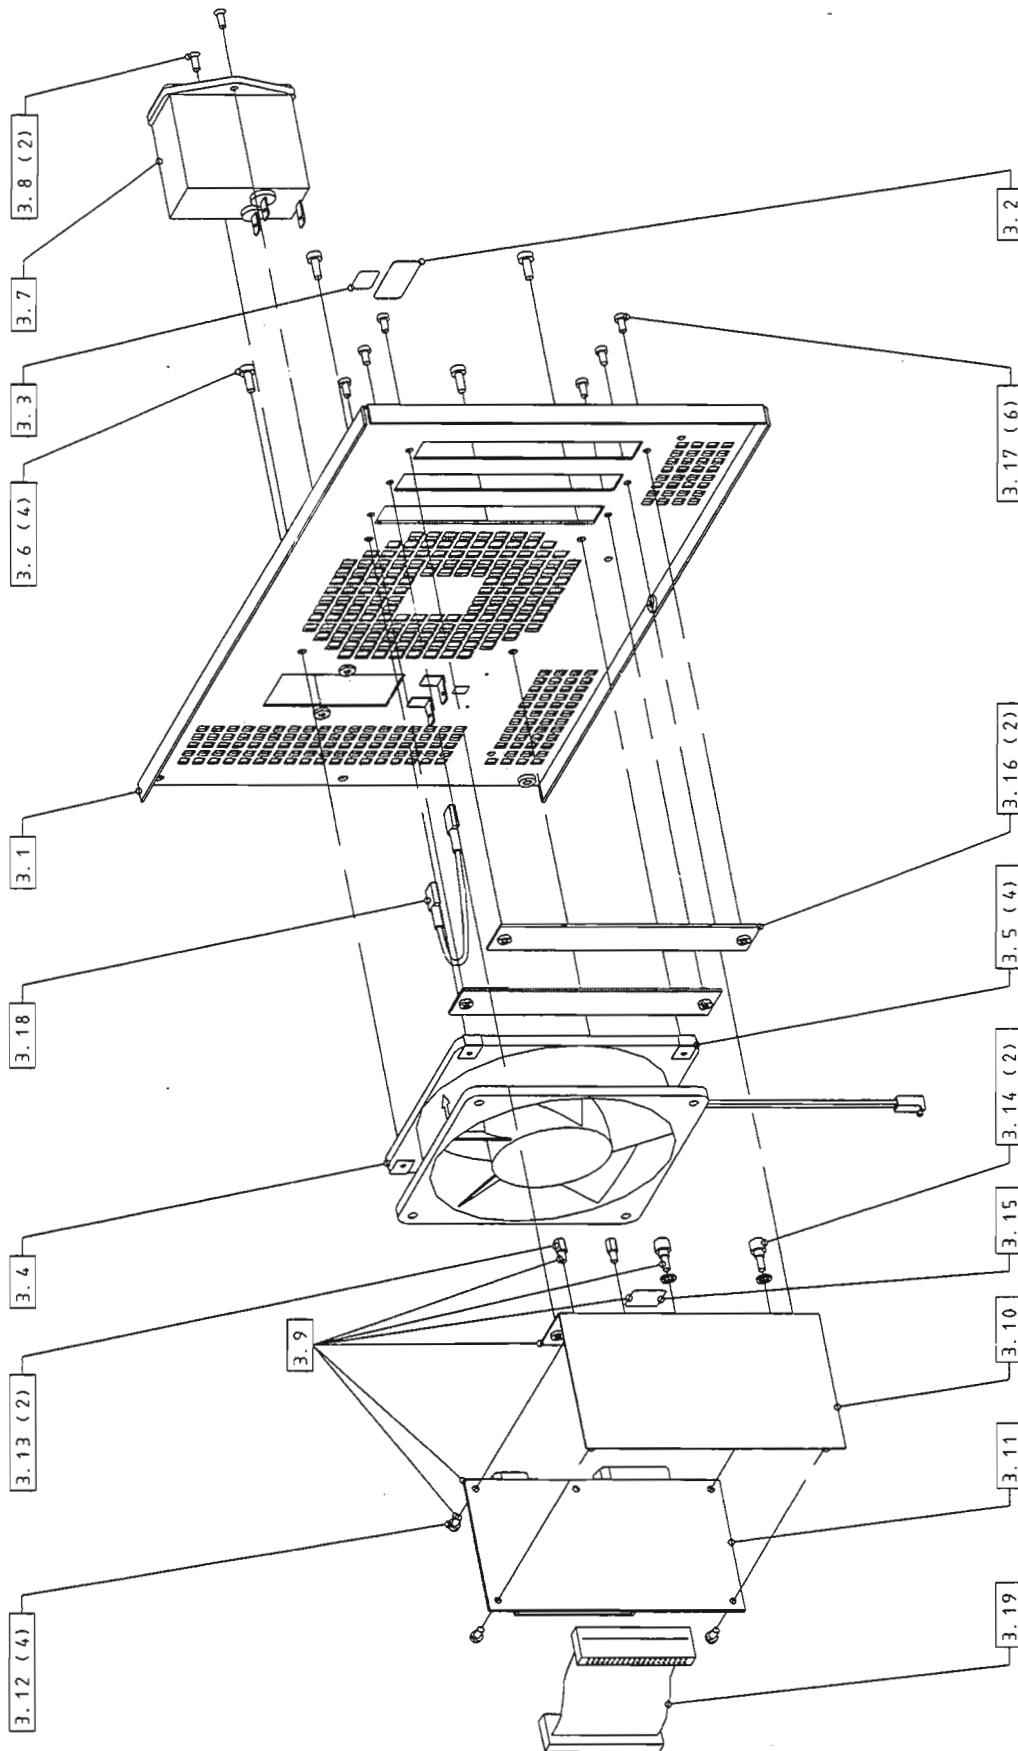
9374/M/L/TM Rear Panel Exploded View
